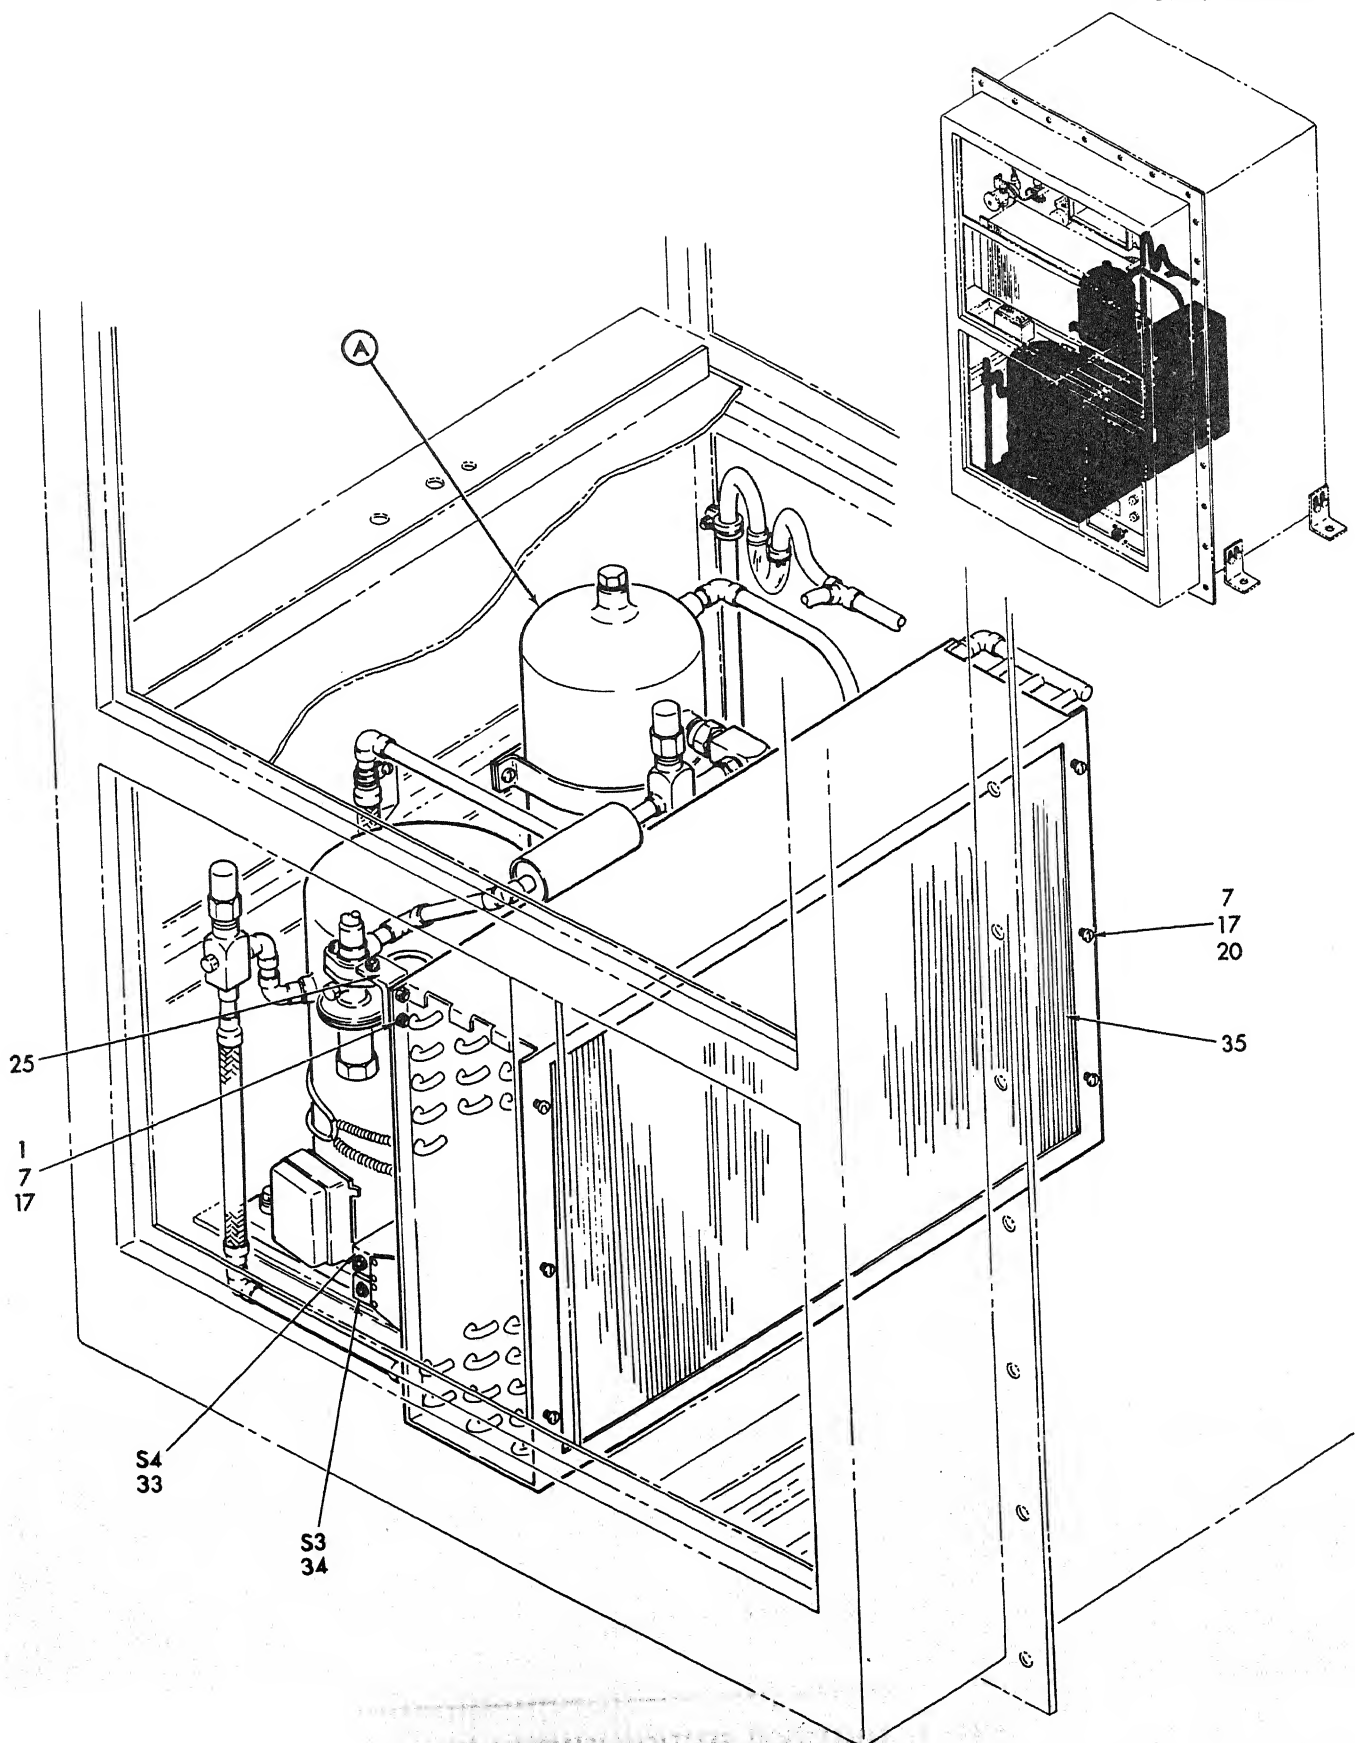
COMPRESSOR SECTION (SHEET 1 OF 2)
